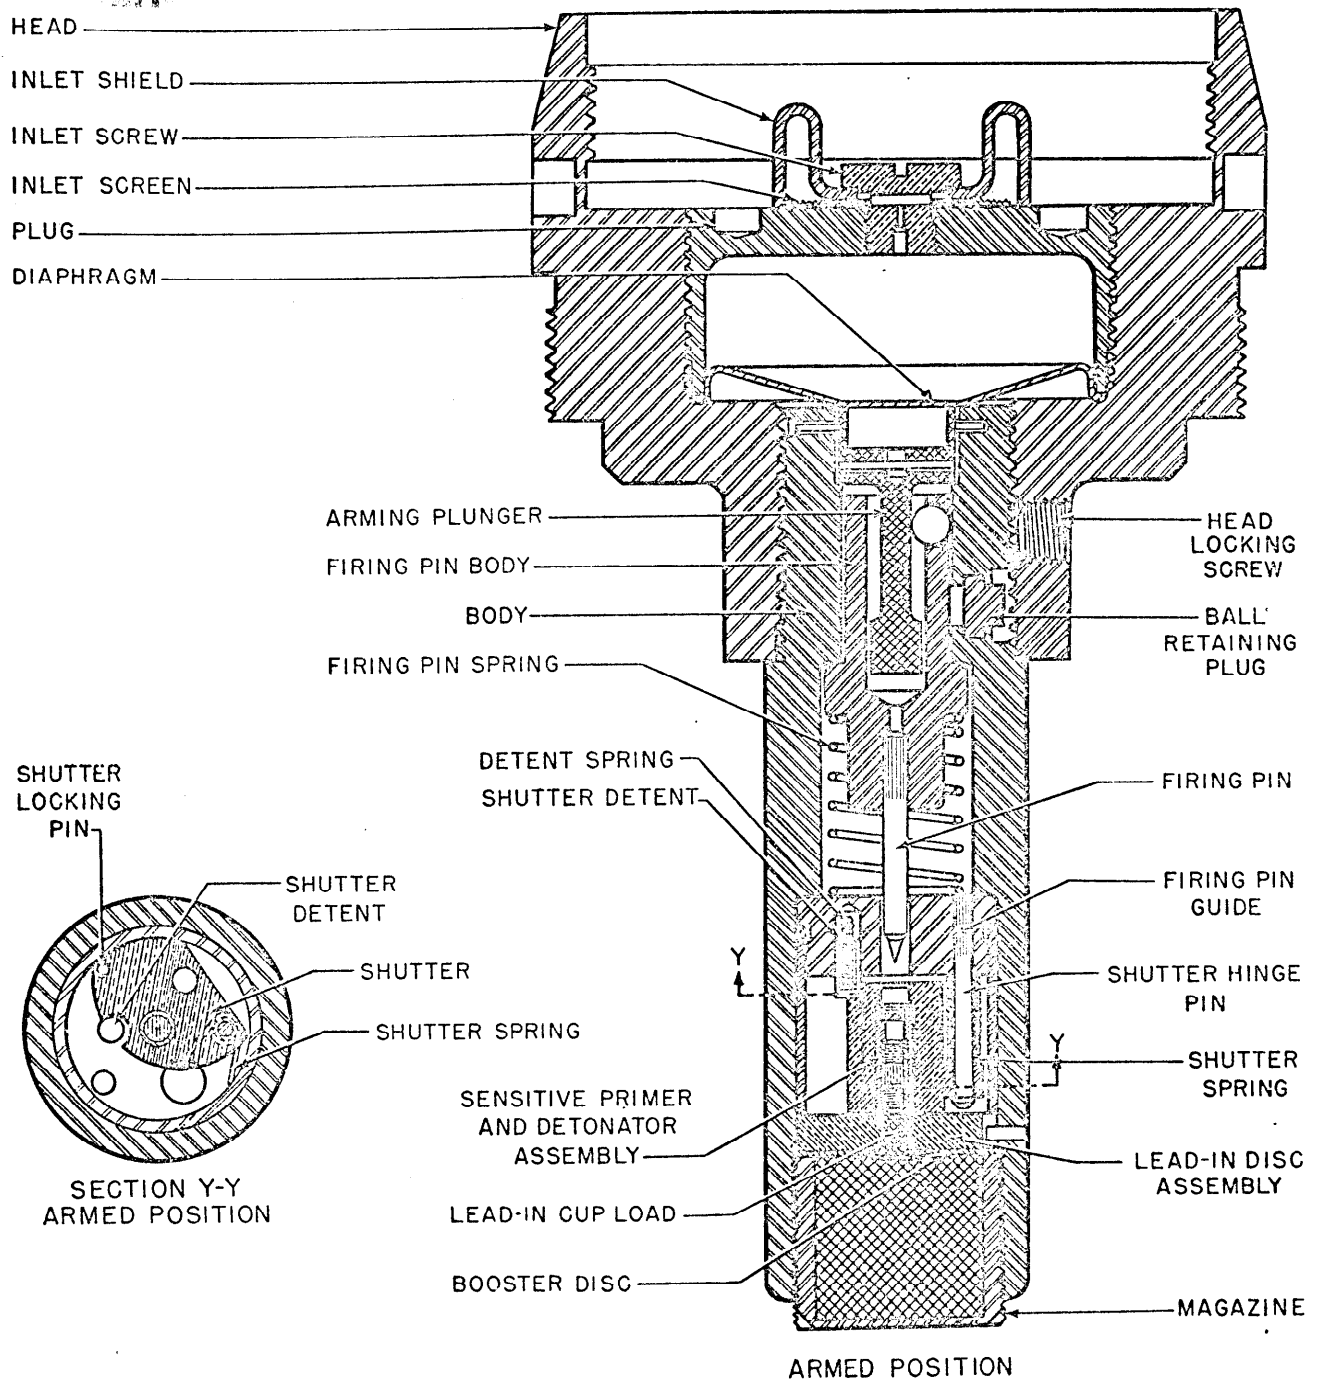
Base Fuze Mk 161, Cross Section View, Armed Position.
